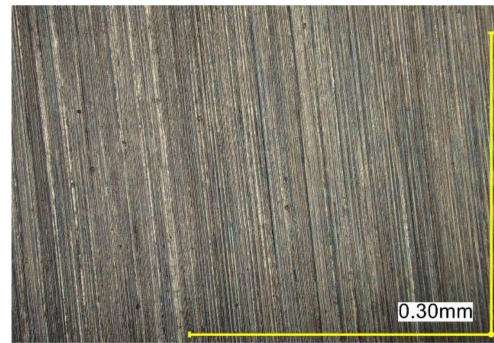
Surface after turning without LFV technology 1.4404 steel with parameters $f_n = 0.03 \text{ mm/rev}$ and $V_n = 869 \text{ rev/min}$; view of the sample at x100 magnification on Keyence VHX-900F.
